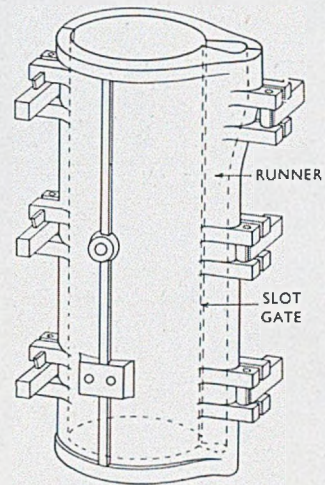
Typical Book Mould for Extrusion Billets in the "Classical" Alloys.
